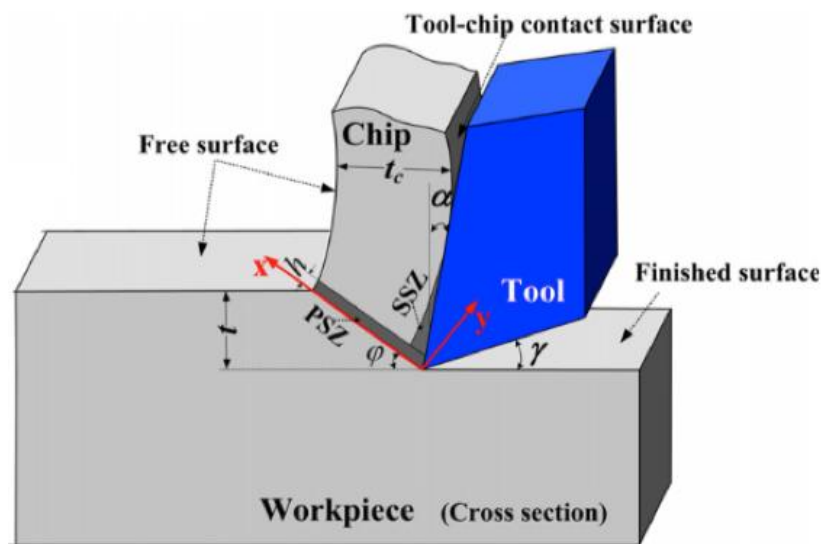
Basic Workpiece-tool interaction in the machining process (Ye, 2012).
